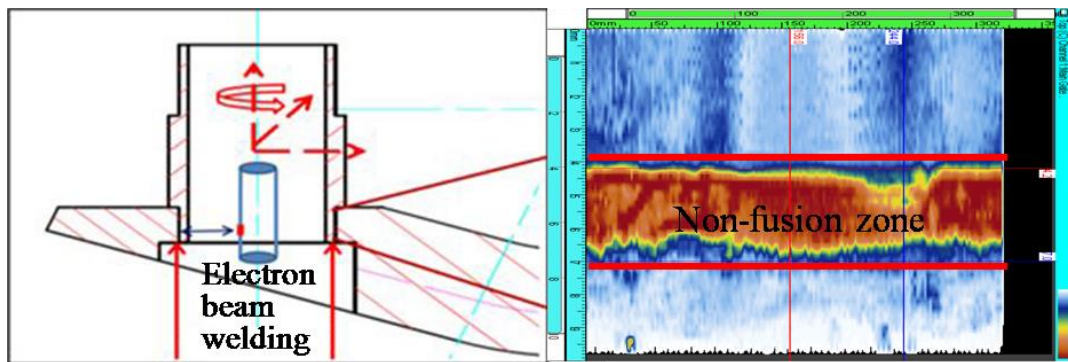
NDT method directly measuring the depth distribution of e-beam welding between cooling tube & manifold box.
